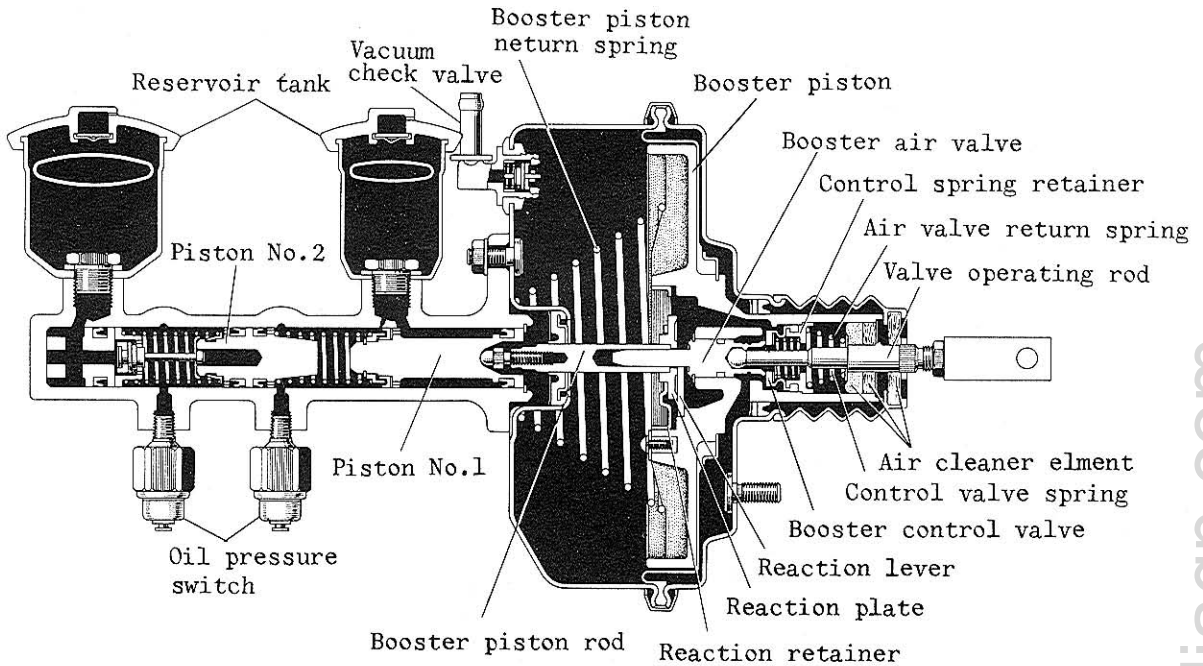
Tandem Master Cylinder & Brake Booster Section View
